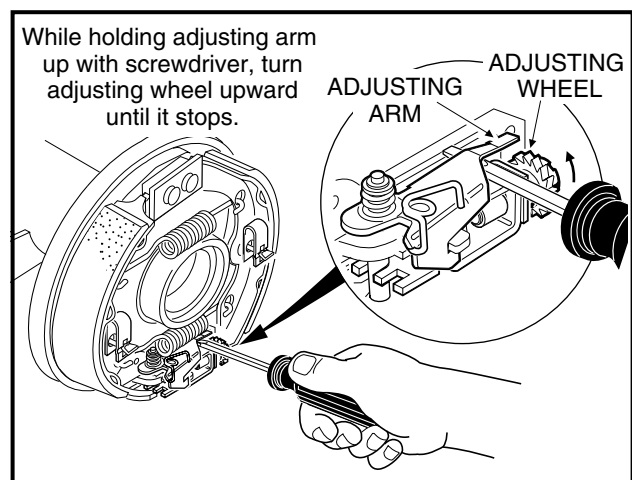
Turn Adjusting Wheel (Self-Adjusting Brakes)
